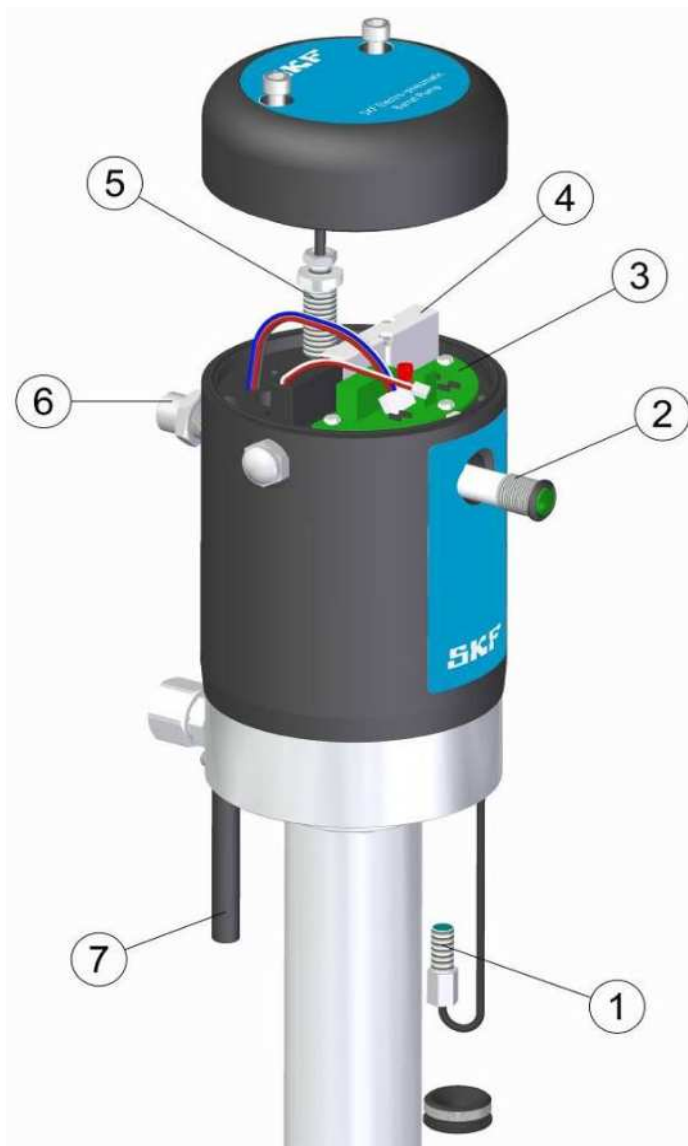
Spare parts for SKF-EPB-PUMP-ECO
